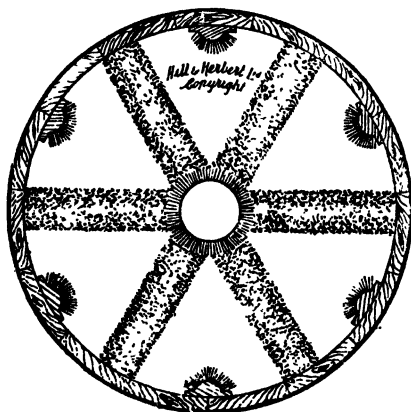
Sunflower Cleaning Machines ; showing arrangement of brushes.
